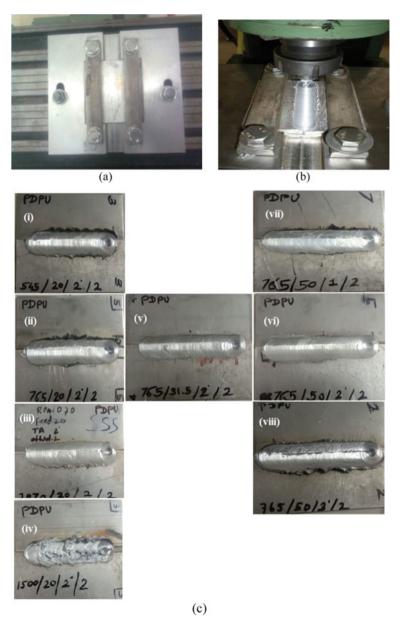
a FSW Fixture, b experimentation during welding and c welded samples
